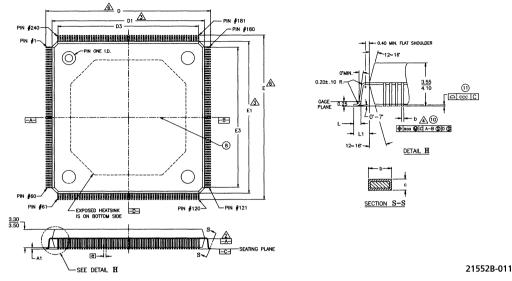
240-Lead Metric Cavity-Up Package with a Heat Sink (PQE)
